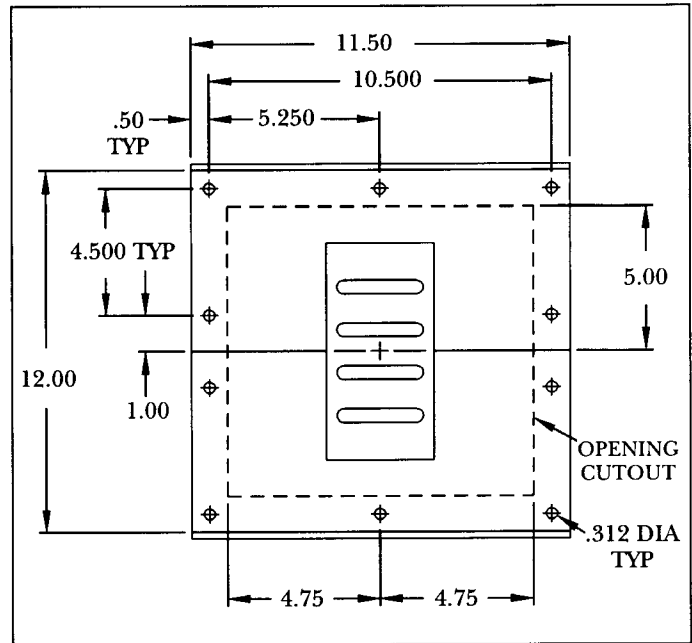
Flanged End Without Lugs - Cutout and Hole Drilling Pattern
